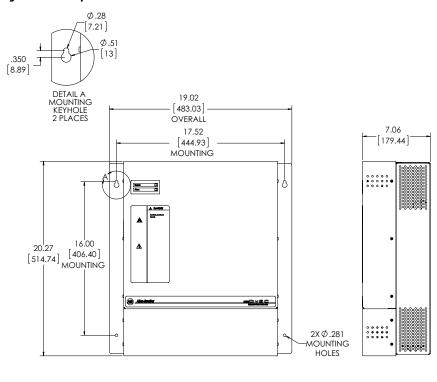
12 Amp and 25 Amp SR Dimensions
